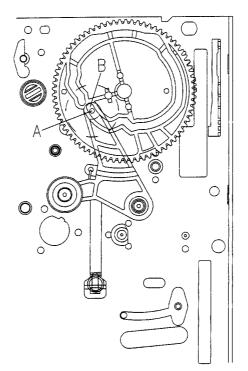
DATUM POSITION OF PINCH LEVER TOTAL ASS'Y & CAM GEAR
